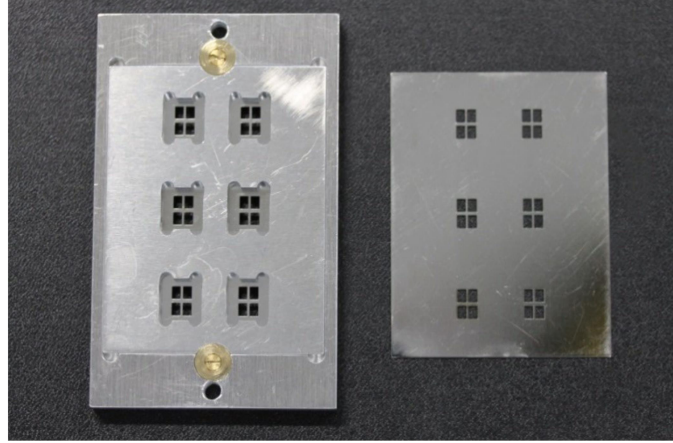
Shadow mask and sample holder for the high vacuum coating plant.
